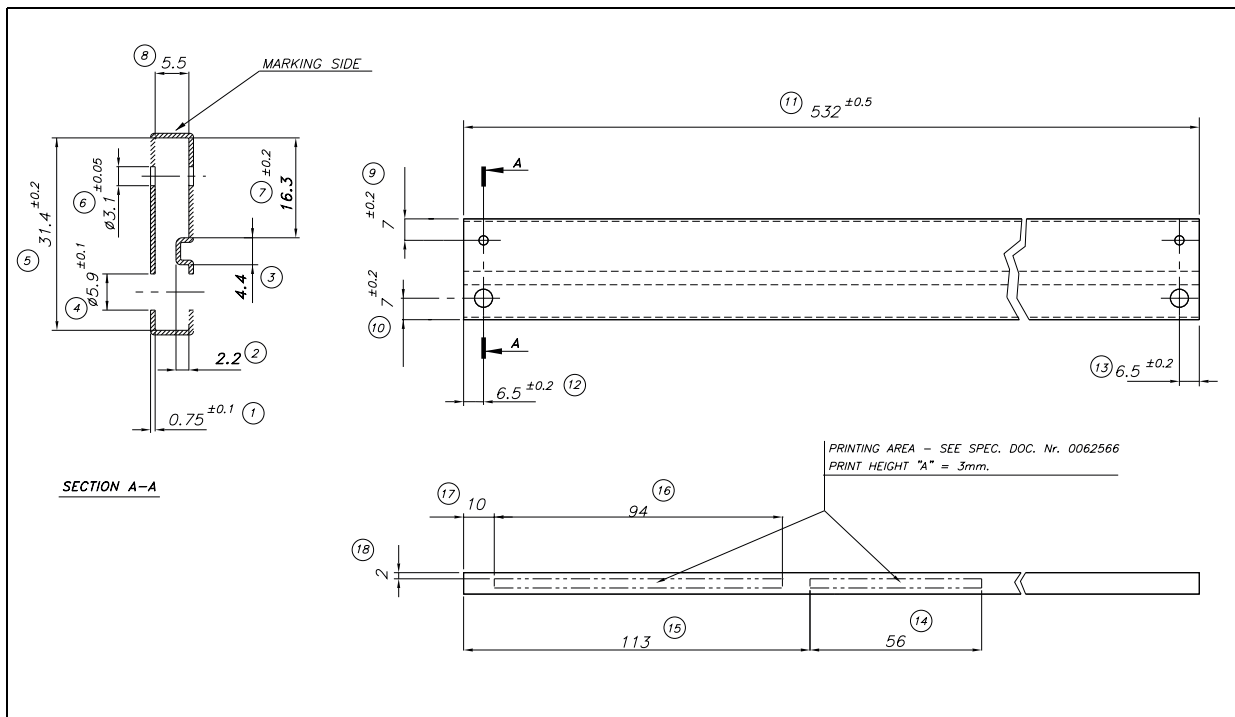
Drawing dimension tube for TO-220 Single Gauge (mm.)
